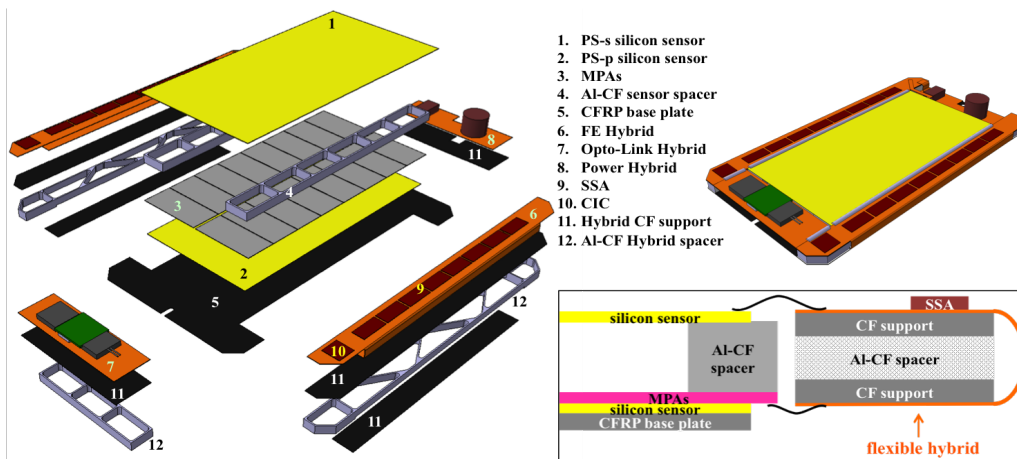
3D schematic of the PS module components (left), 3D view of the assembled module (upper right), and a sketch of the FE Hybrid folded around its support (lower right). The module is mounted on five cooling elements on the mechanical support structure[47]
